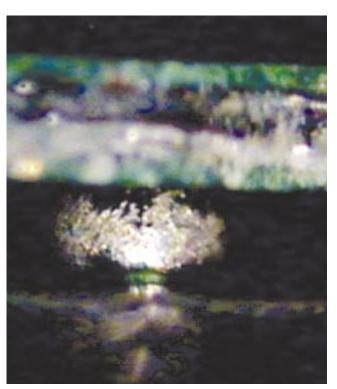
Endoscope Photo of a SnAgCu BGA Solder Ball
